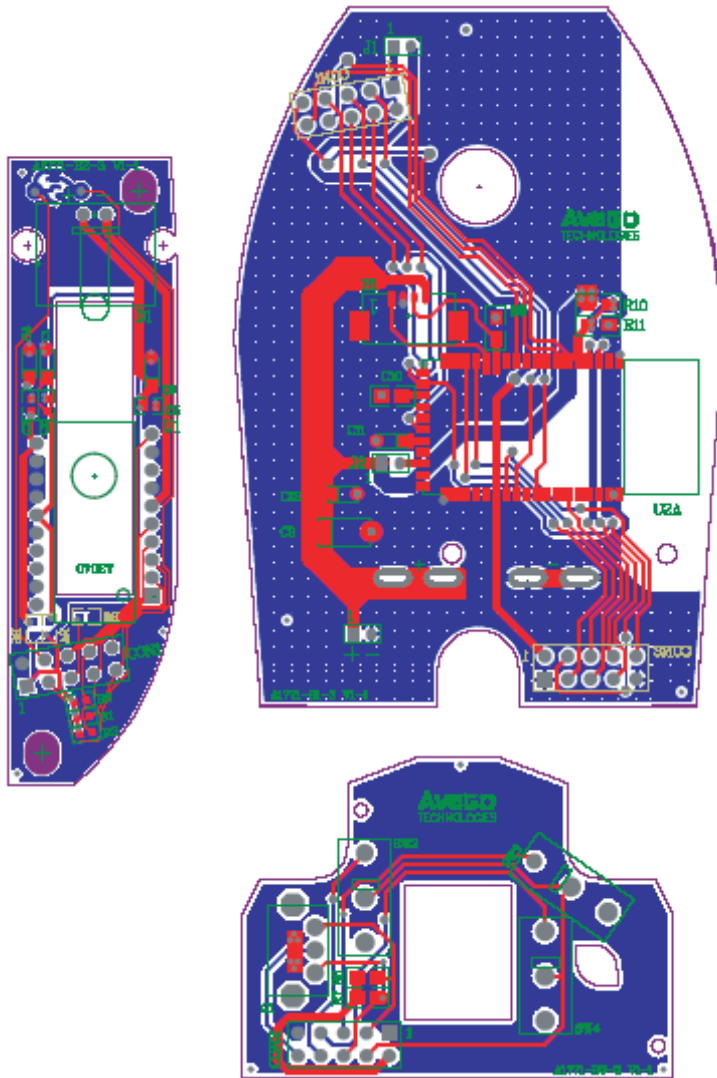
PCB layout for main board, sub-board 1 and sub-board 2 of ADNK-3043-BRBT wireless optical mouse designer's kit
